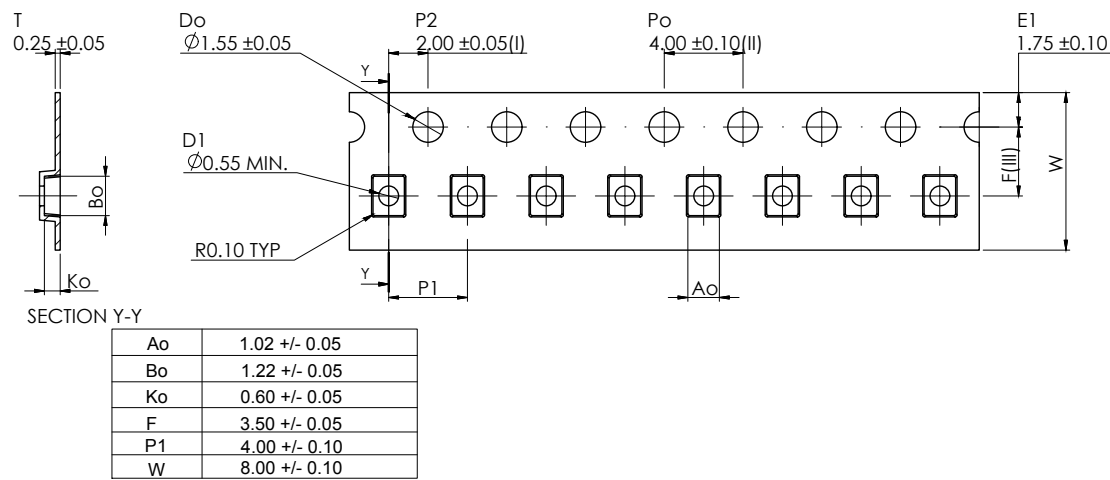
Drawing of tape (first-angle projection) with tape dimensions
